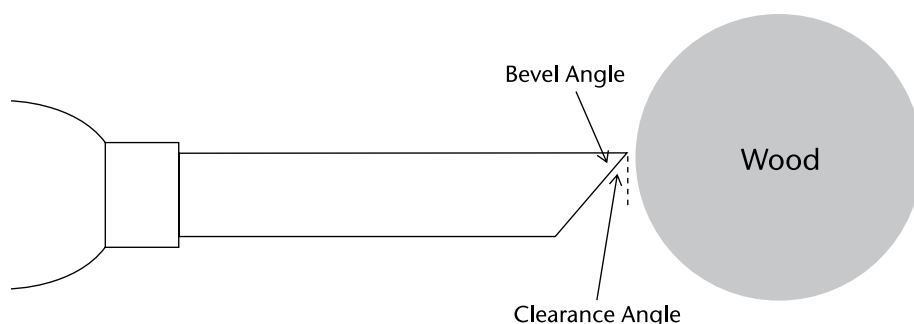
Clearance angle for scrapers is measured by holding the tool's cutting edge next to the spindle turning.
